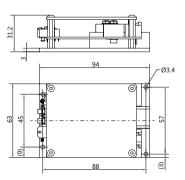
Outline drawing of DP-SP series drivers with conductive pad
